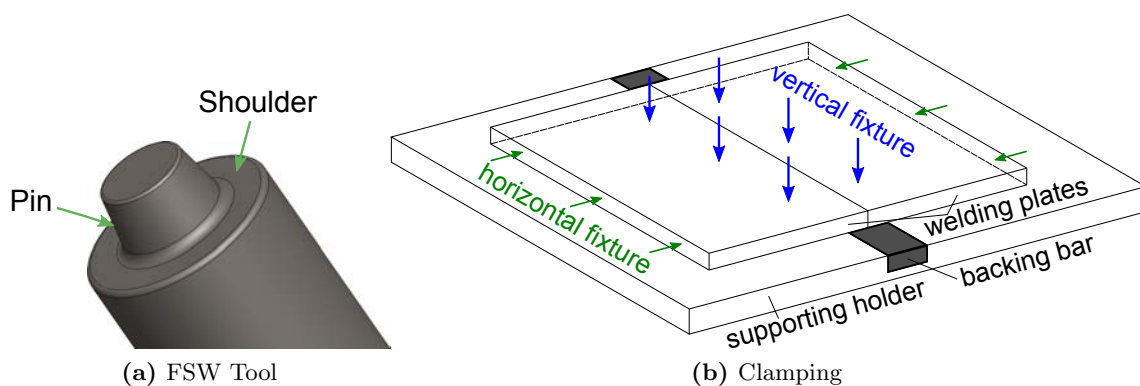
Friction stir welding - tool and clamping.
